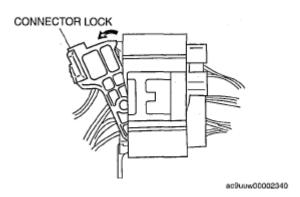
Pulling Out Connector Lock Courtesy of MAZDA MOTORS CORP.
